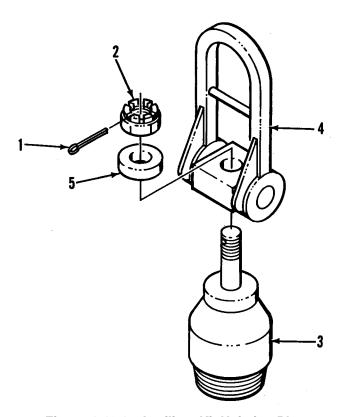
Auxiliary Kit Hoisting Plug
